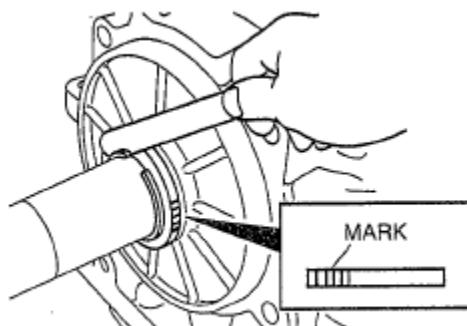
Installing Thrust Needle Bearing And Bearing Race
